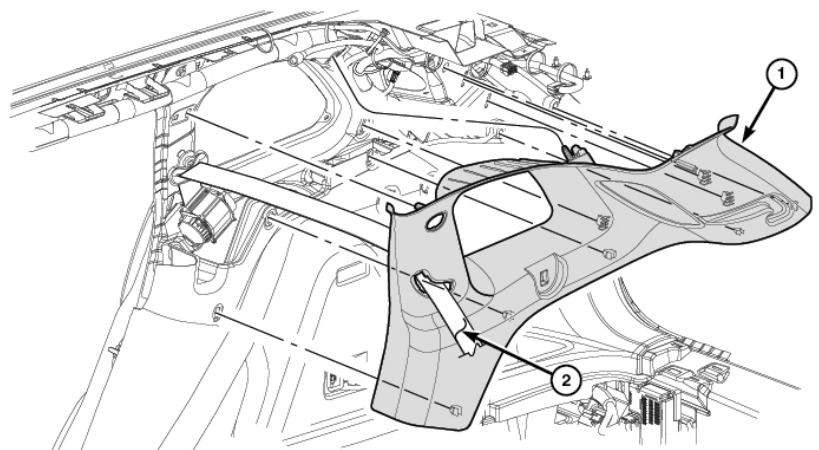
Upper Quarter Trim Panel (Passenger Side Shown, Driver Side Similar)
